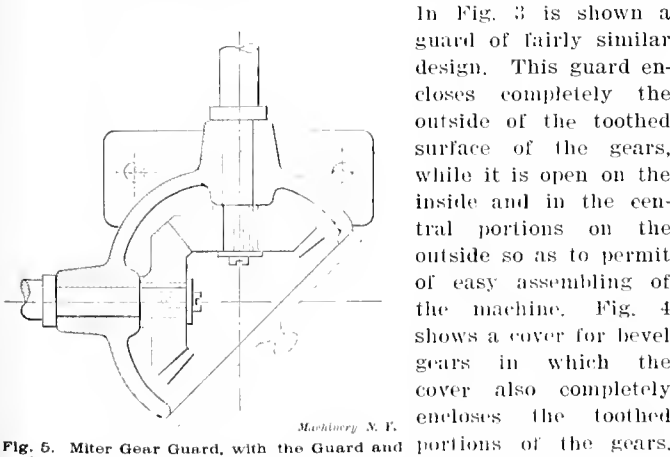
Miter Gear Guard, with the Guard and the Bearing for the Shaft cast in One Piece.
